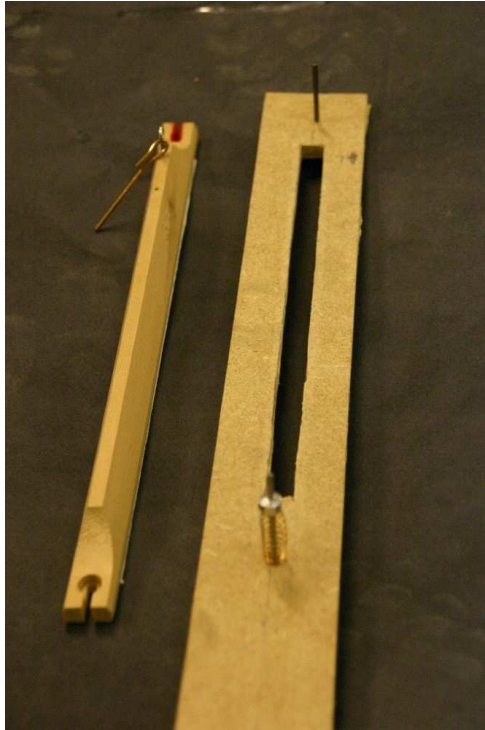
Board with pallet opening cut into it with a pallet laid alongside. The back of the assembly is at the front of the photograph.
